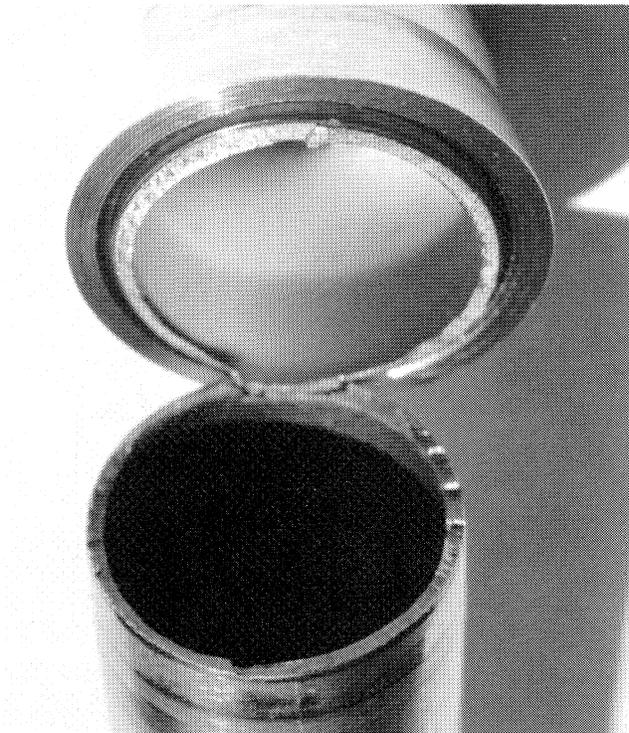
Lube Oil Line Failure due to Overtightening of 1in Tubing Connection. Scoring Initiated Fatigue Fracture.
